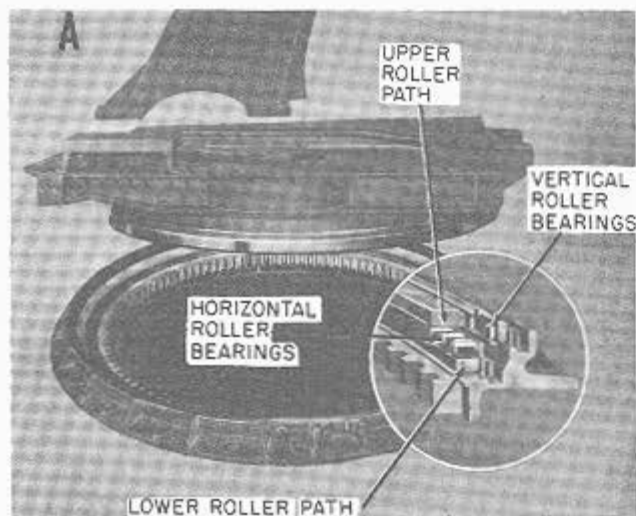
B3.—Details of the stand and carriage. A. Roller bearings.
